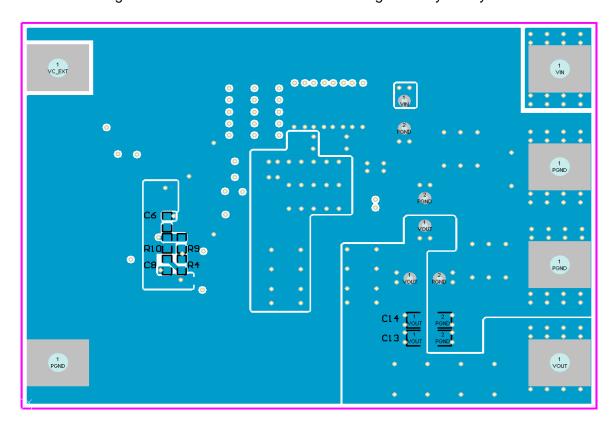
IRPP3637-18A Reference Design bottom layer layout.
